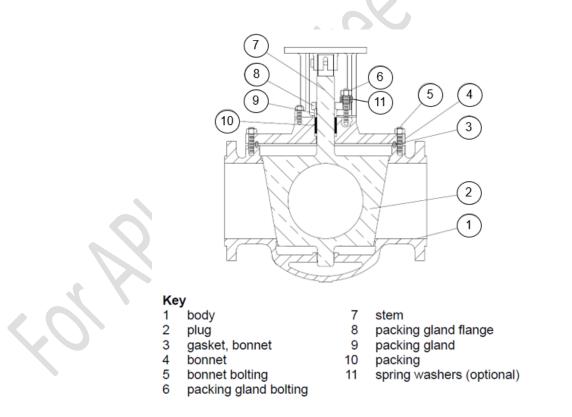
Parts Identification for Nonlubricated Lift Plug Valve
